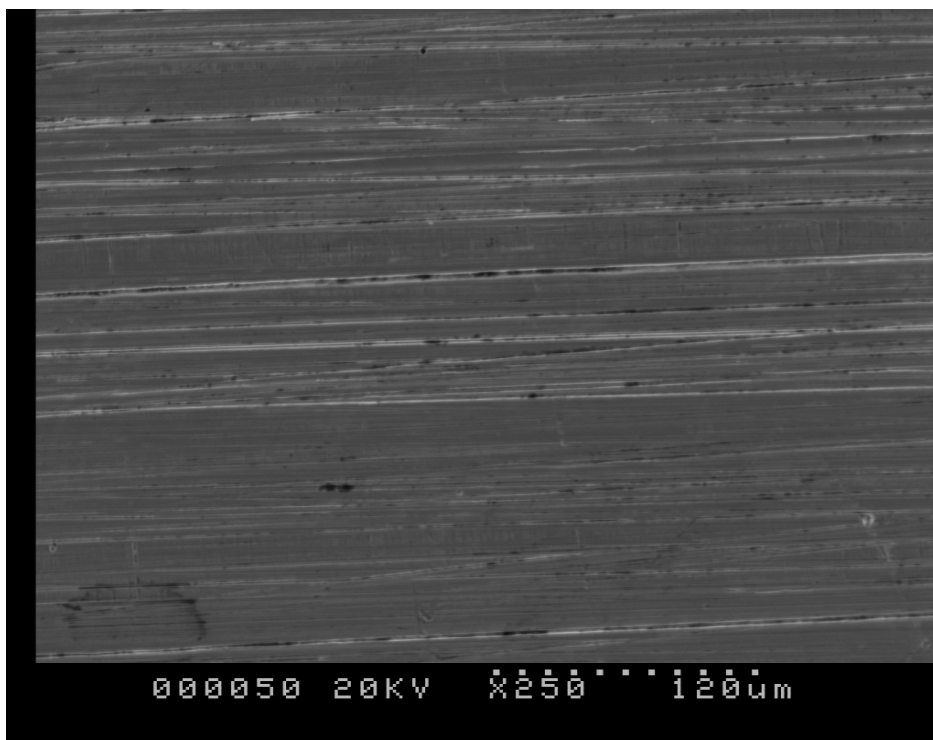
Original Surface of 52100 rod showing Grinding Marks. Magnification X250
